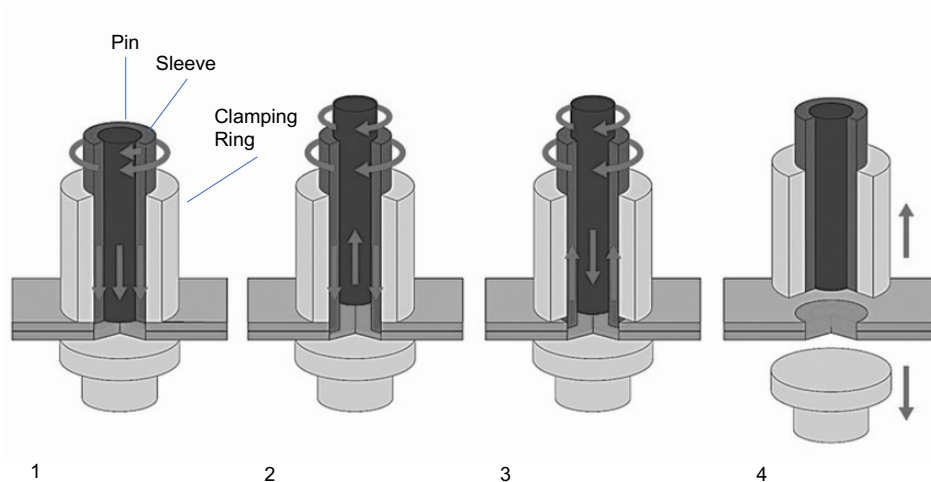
Illustration of RFSSW process using sleeve plunge variant: (1) Clamping and tool rotation; (2) Sleeve plunge and the pin retraction; (3) Parts back to surface level; and (4) Tool removal.[33].
